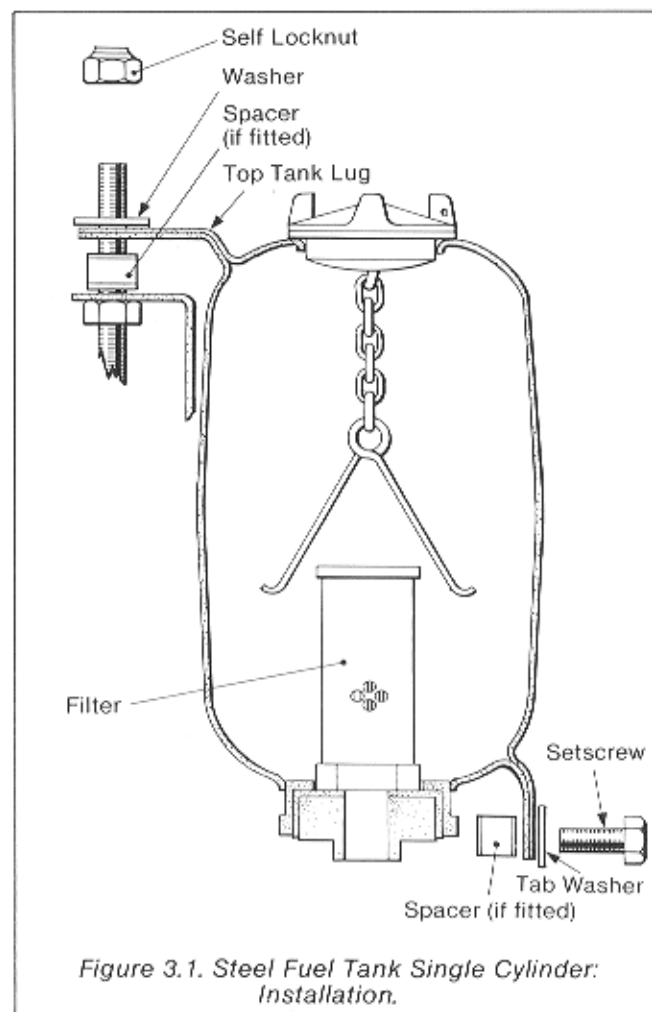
Steel Fuel Tank Single Cylinder: Installation.
